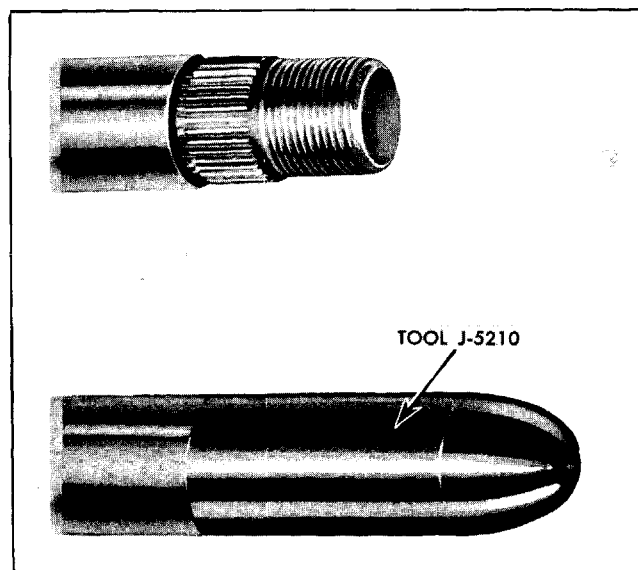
Tool J-5210 Installed on Steering Shaft
